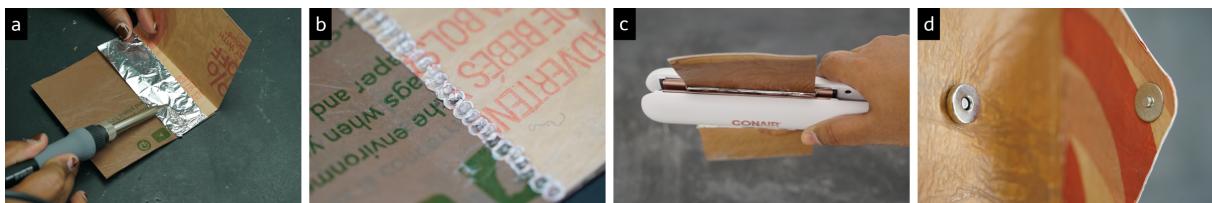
(a-b) Local fusion using a soldering iron, (c) using a flat-iron, and (d) mechanical assembly using magnetic snaps.
